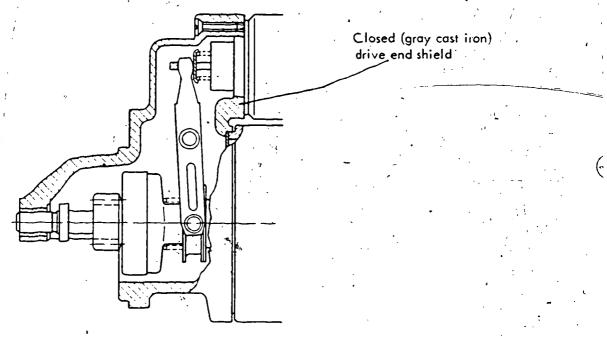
New type of starting motor with closed gray cast iron drive end shield
